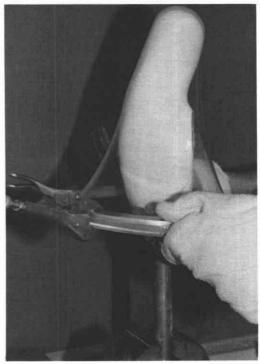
A flexible socket is made by vacuum molding, using Surlyn(R) or Ethalux polypropylene.
